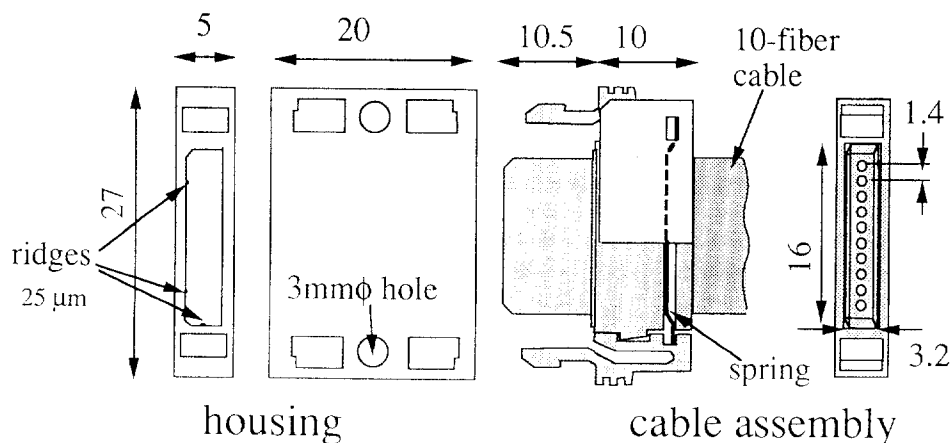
Schematic drawing of the type B connector. The cable assembly is inserted in the housing and the internal spring keeps the cable assembly from being disconnected.
